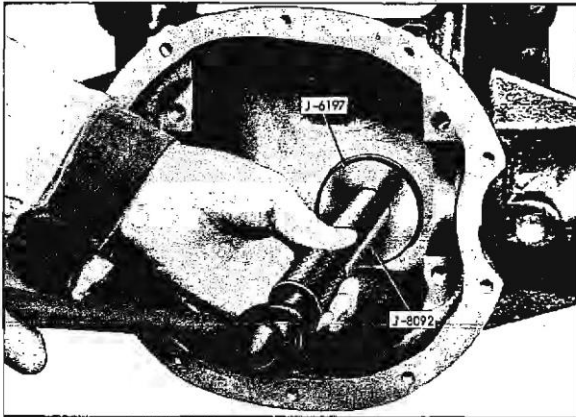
Installing Rear Pinion Bearing Outer Race
